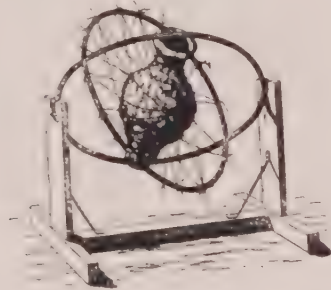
Ancient Centrifugal Casting Machine. Date unknown.
